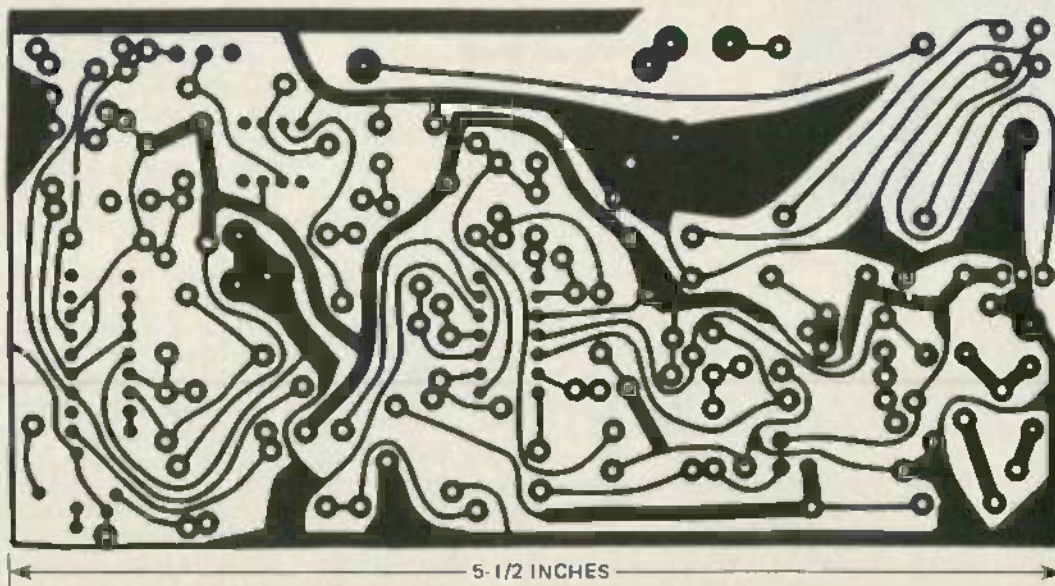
SINGLE SIDED PC BOARD contains sync corrector, RF modulator, and power supply.
